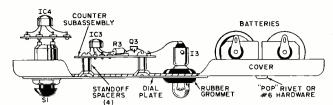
This cutaway view of the front cover shows how the subassembly is mounted on the spacers. Observe that the mounting screw holes are recessed a bit so the dialplate can lay flat on the cover assembly.
